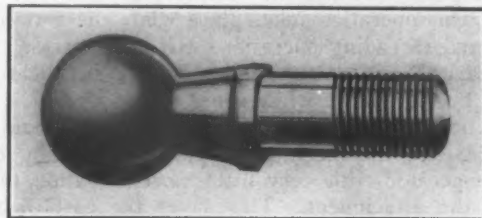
A Radius Stud with Milled Flats, Made Complete in a Screw Machine.
